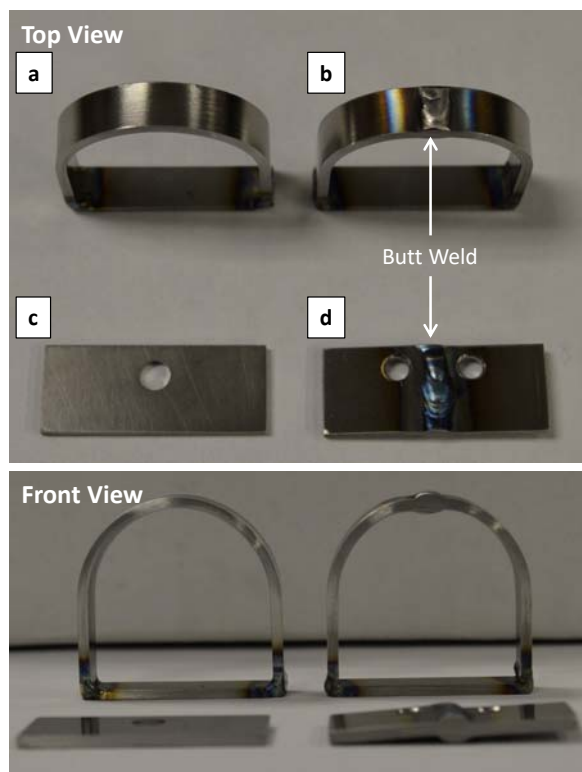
Haynes 230 finished samples for (a) U-bended coupon, (b) welded U-bended coupon, (c) flat coupon, and (d) welded flat coupon.
